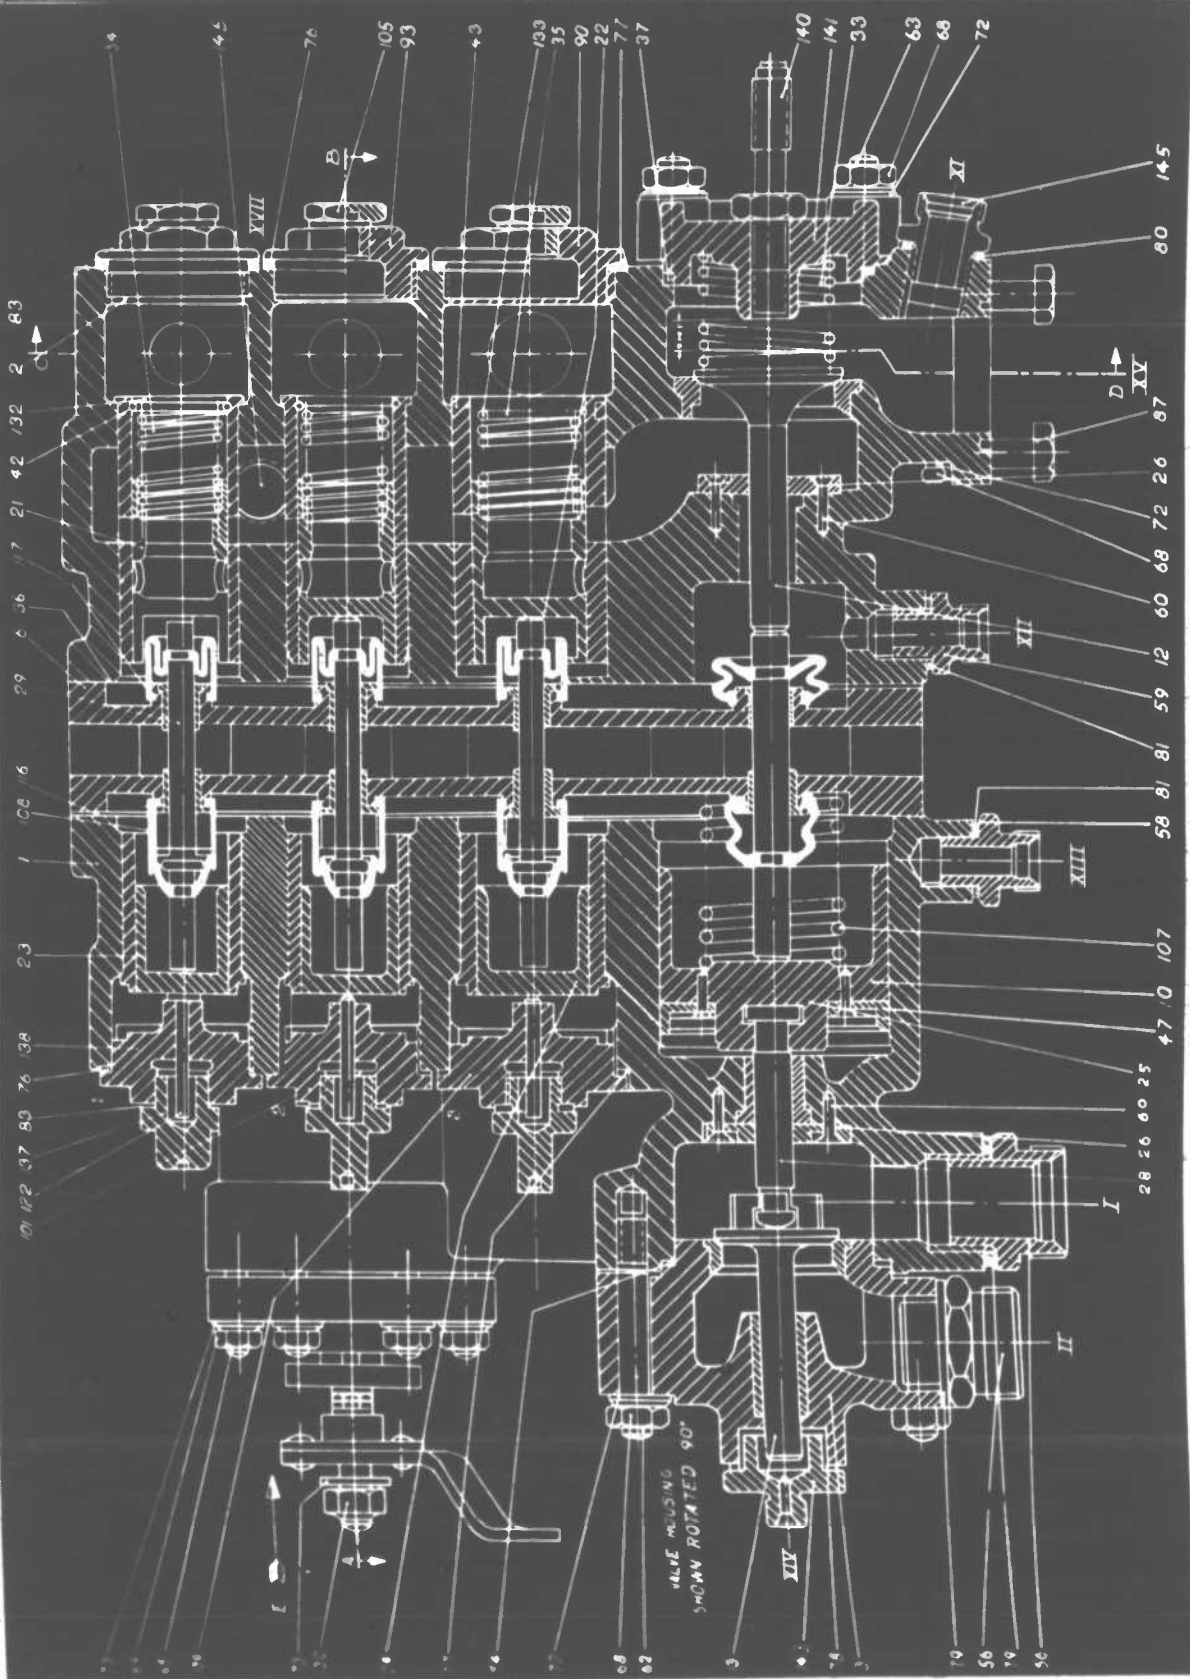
Regulator Assembly - German Drawing No. 100-500,381-000.10
